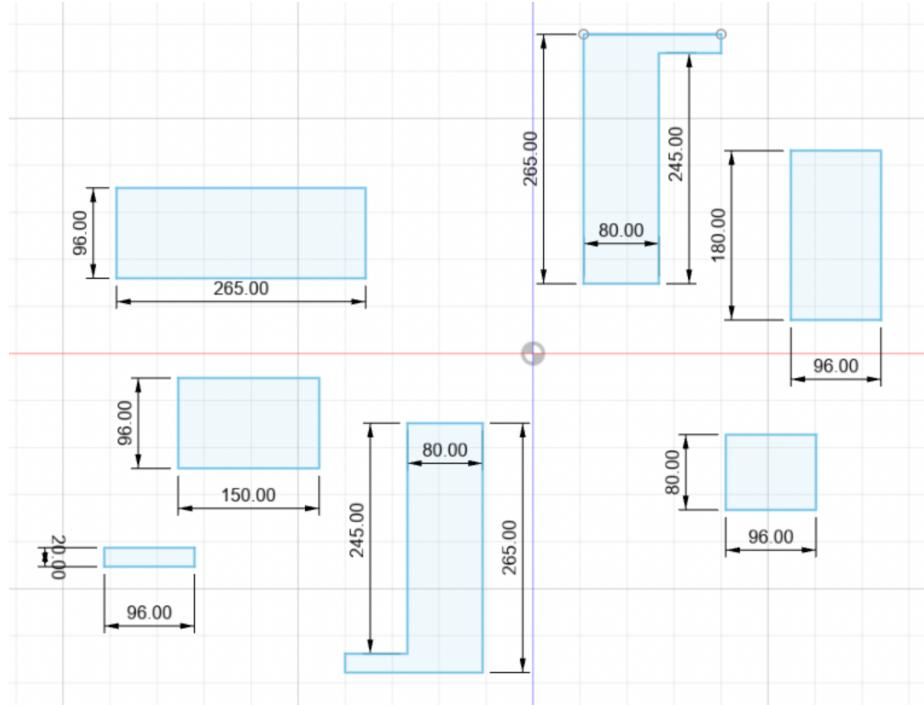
CAD sketch of the acrylic shell. Dimensions are shown in mm.
